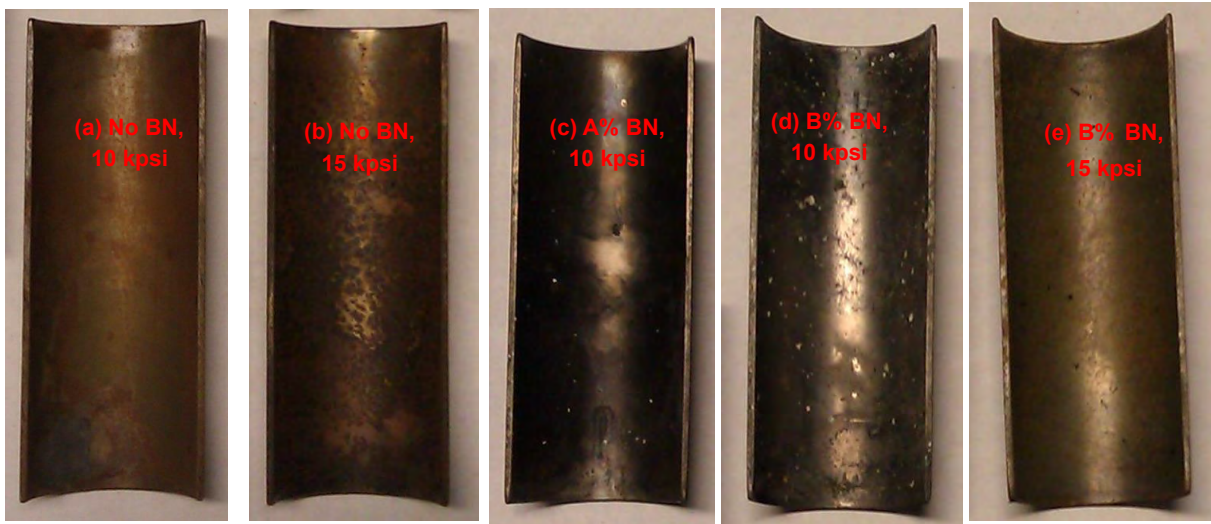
Photographs of steel inserts after closed bomb testing at ~10,000 psi and ~15,000 psi; listed in Table 1; Steel inserts after bomb testing samples fired with a composite propellant containing BN (A<B) had less oxidation than sample fired with pure propellant.
